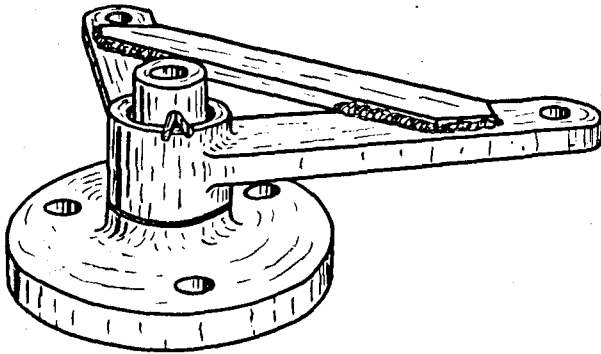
OLD STANDARD CRANK & CRANK STAND ASSEMBLY.
